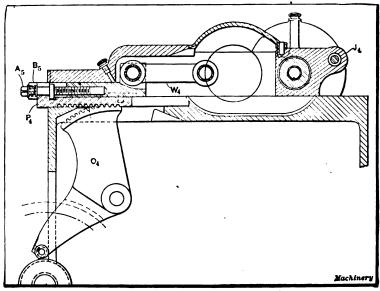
Partial Section of No. 2 Machine showing Operation of Turret Slide
